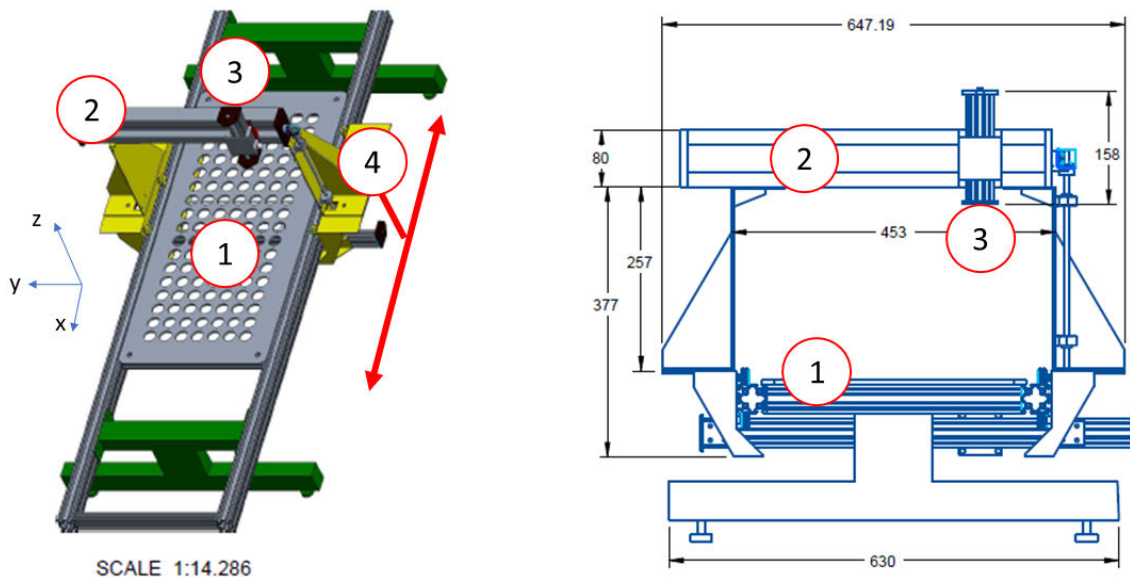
Test Rig Design Drawing(Cooney 2020)
